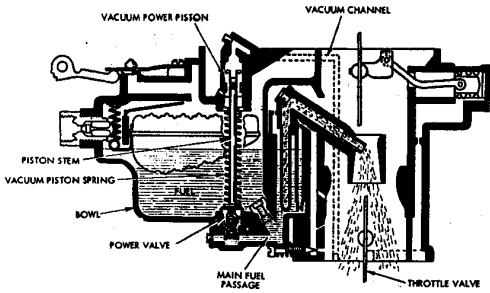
When the throttle valve on this cross sectioned carburetor is open, as shown, engine vacuum becomes low and allows the spring to push the stem and piston downward. The stem opens the power valve which allows additional fuel to flow from the fuel bowl into the main fuel passage.
